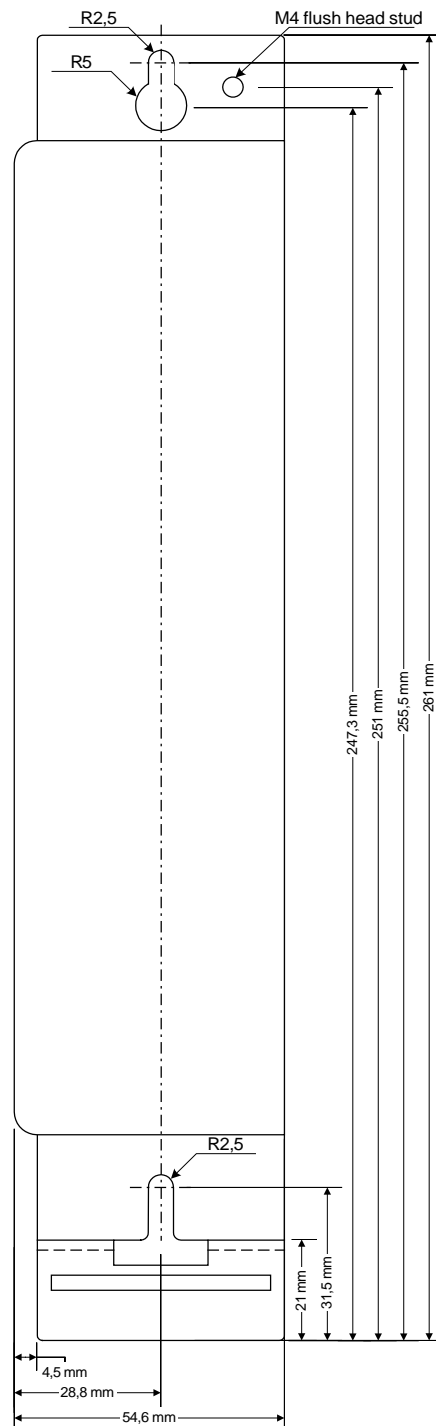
Servo drive ARS 2100 SE: Mounting plate
